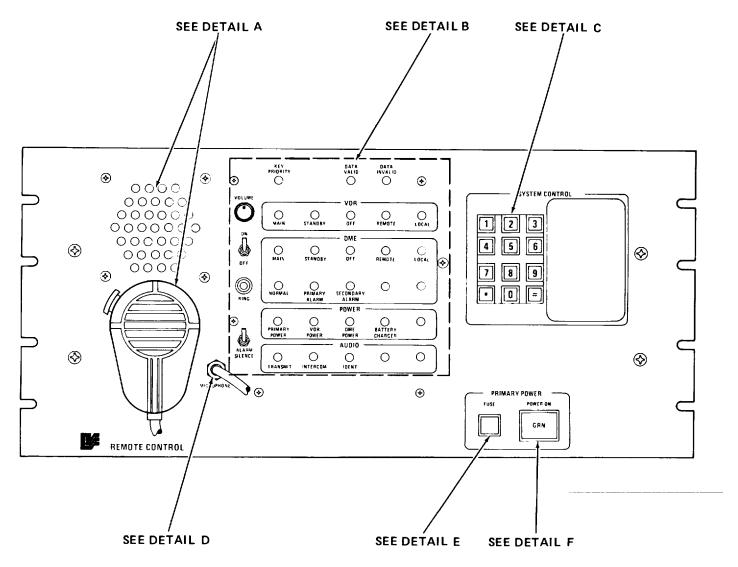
Control-Indicator Front Panel and Chassis-Mounted Parts Location Diagram (Sheet 2 of 3)
